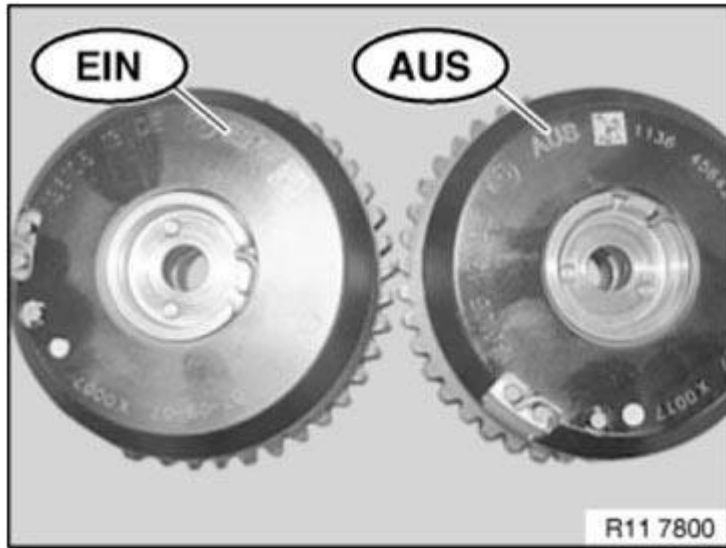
Identifying Intake And Exhaust Camshaft Adjusters Mark
